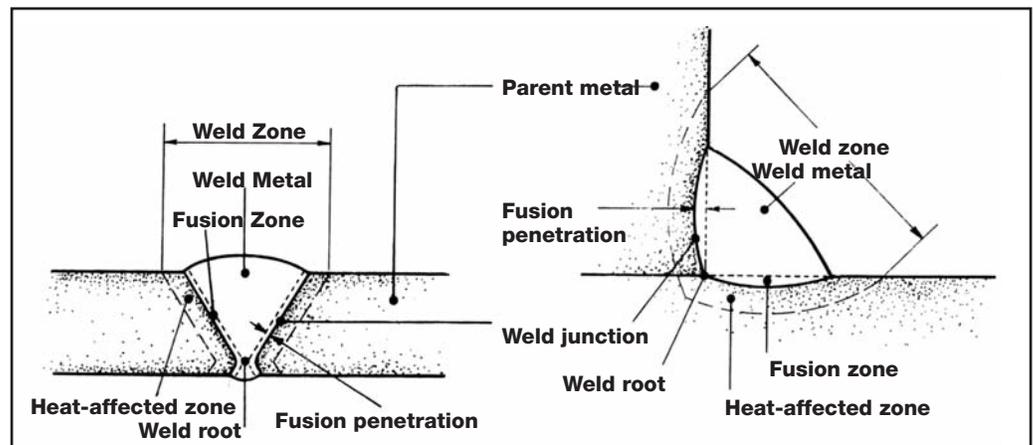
Weldment terminology for a butt weld (left) and a fillet weld (right). Source: AWS A3.0: 2001.
